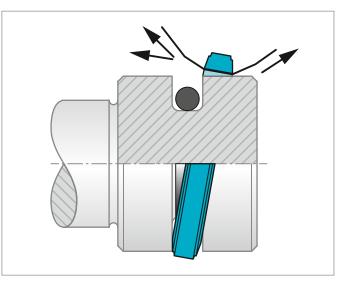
Fitting the seal ring onto the O-Ring in the groove
